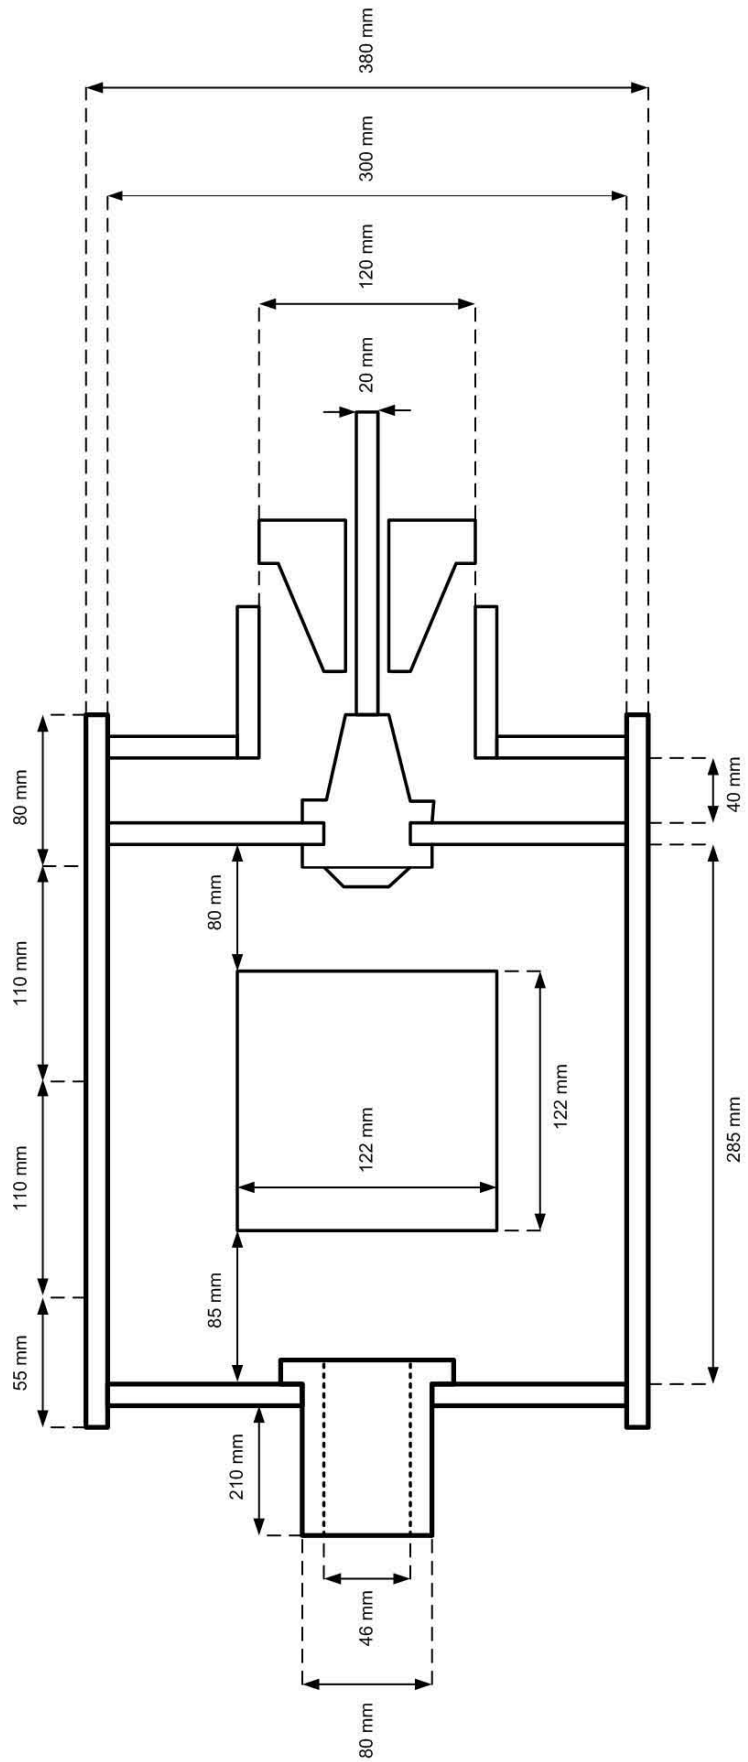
A schematic of the new 300mm mill with dimensions.
